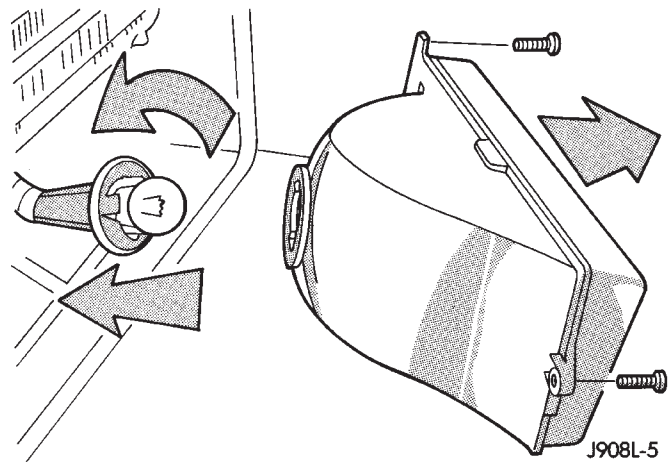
Headlamp Bezel & Side Marker Lamp—XJ Vehicles
